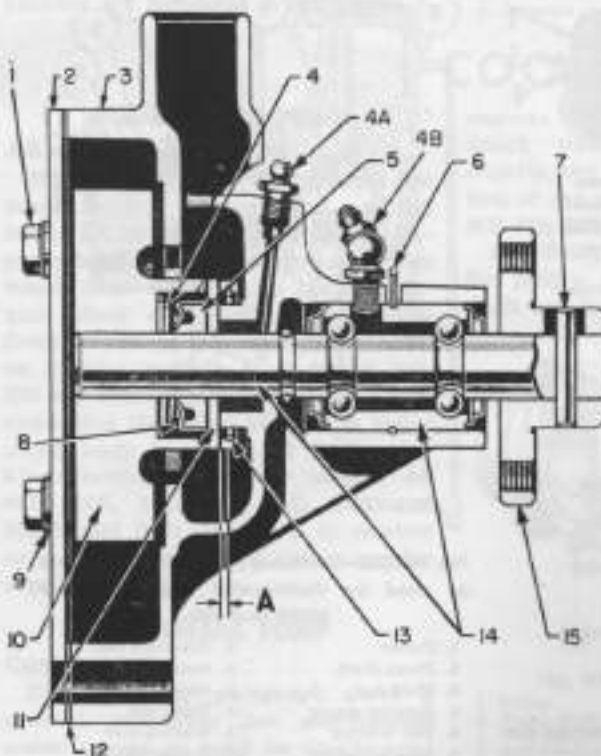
Sectional view of water pump as used on Chrysler engine models T100 and T120.
